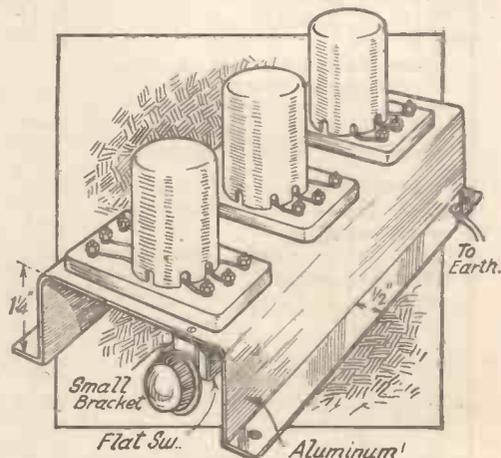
A neat way of building up a complete coil and switch assembly.
